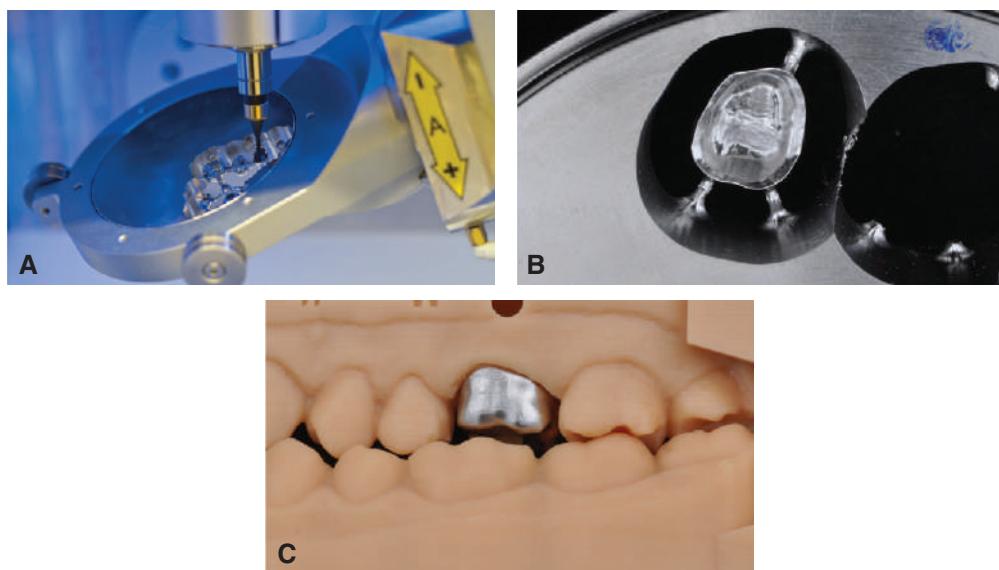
(A) 5-axis milling machine. (B) Milled Co-Cr framework. (C) Milled Co-Cr framework separated from disk and seated on the 3D-printed resin cast.
